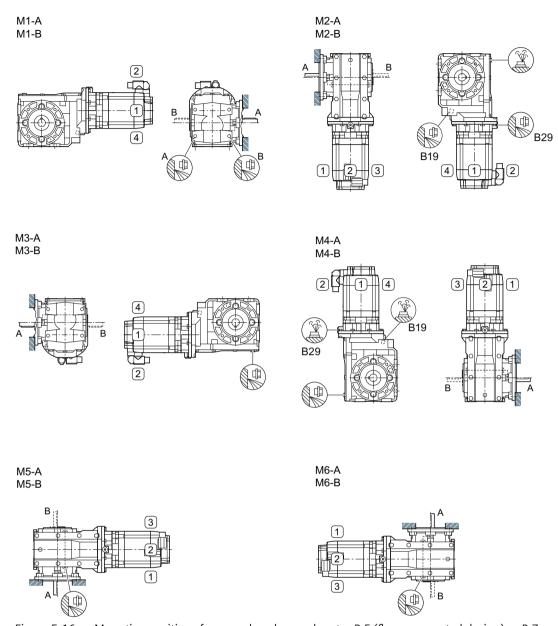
Mounting positions for servo bevel geared motor B.F (flange-mounted design) or B.Z (housing flange design) frame sizes 19 - 29, 2 stage
